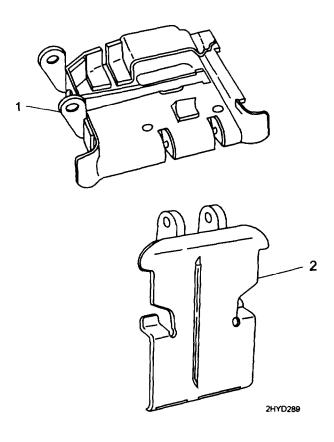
Group 09 Tray and Hanger Assembly (M60 only), PN 8448237
